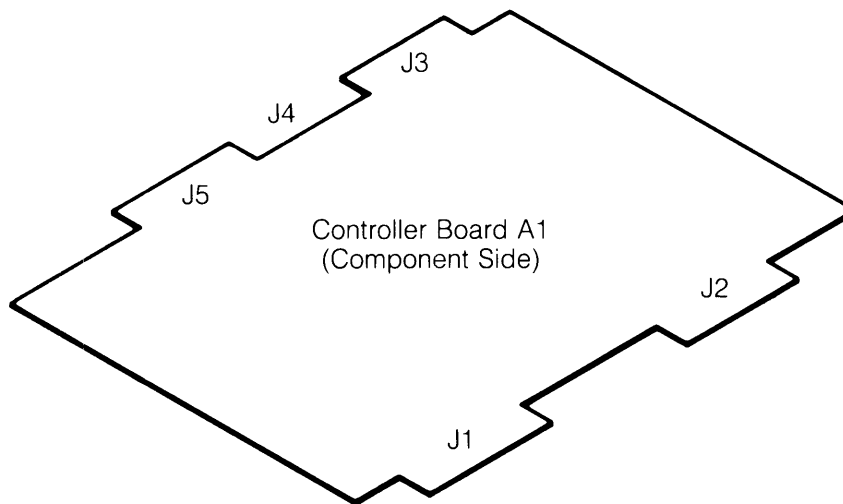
Controller Board A1 (07902-66510) Connectors
